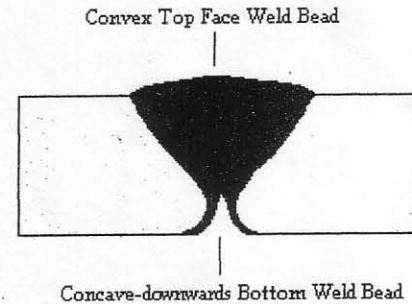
Schematic of the cross section of weld bead without wire feeding
